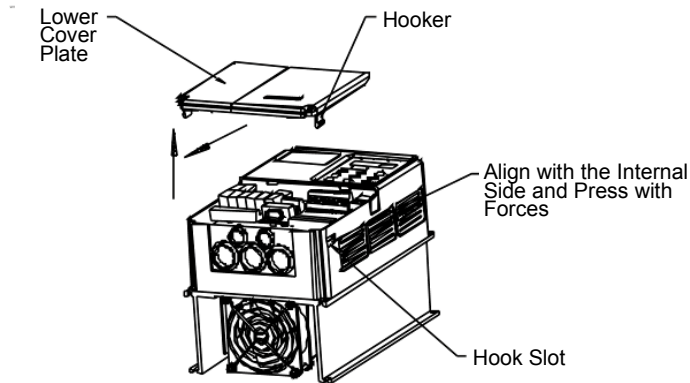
Removing the Lower Cover Plate of Plastic Enclosure
